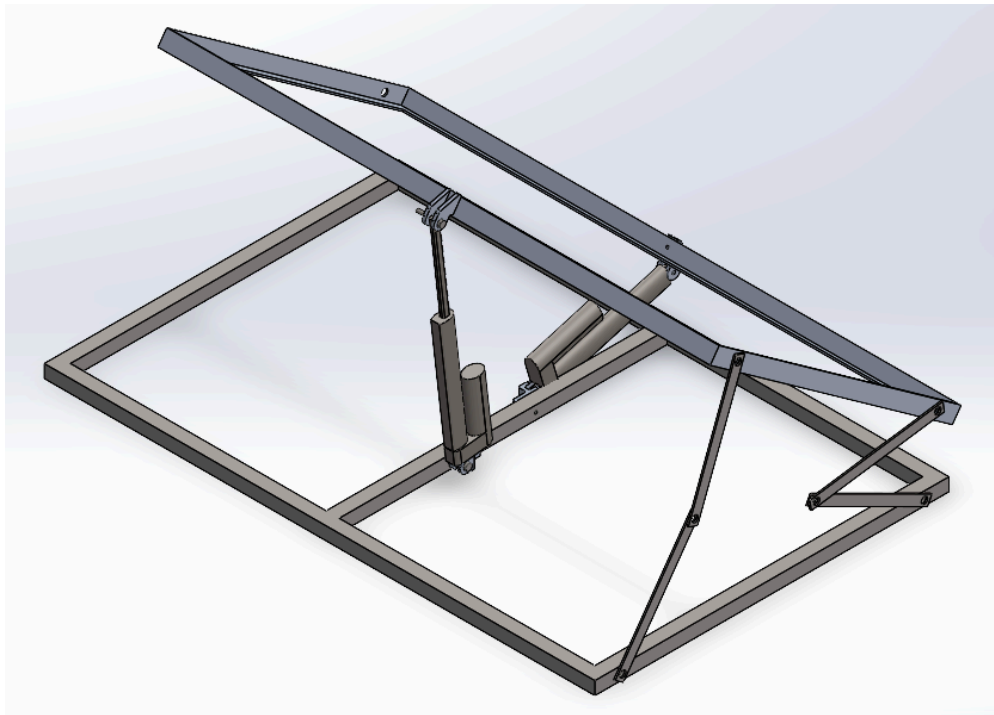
Initial SolidWorks CAD model of the rotation mechanism. *Linear actuators (center) drive panel angle via aluminum hinge brackets. Scissor hinges (sides) provide shear load distribution.
